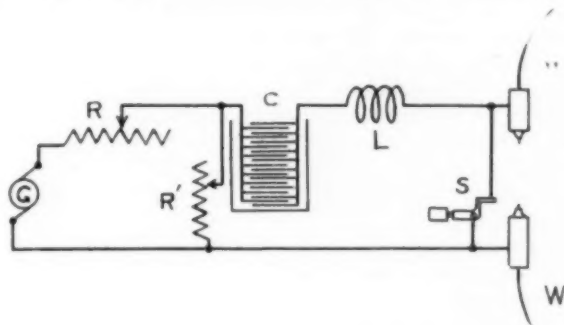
ELECTROPERCUSSIVE WELDING
